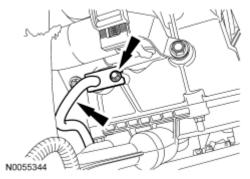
Identifying Transmission Fluid Cooler Tube Bolt Courtesy of FORD MOTOR CO.
